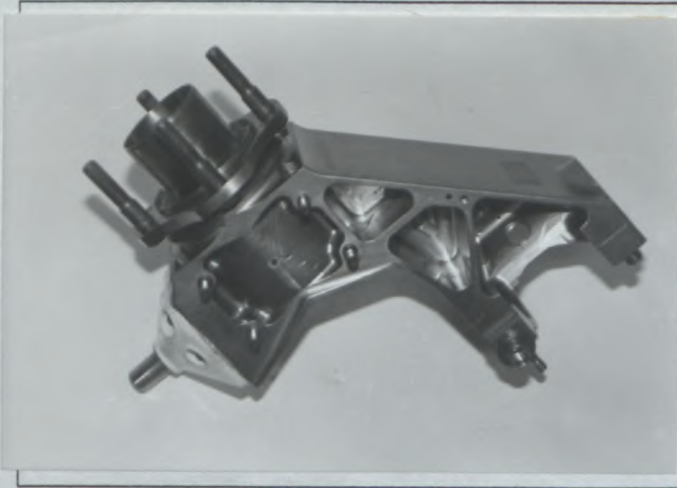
FRONT REINFORCED TOP MOUNT TYPE 1
